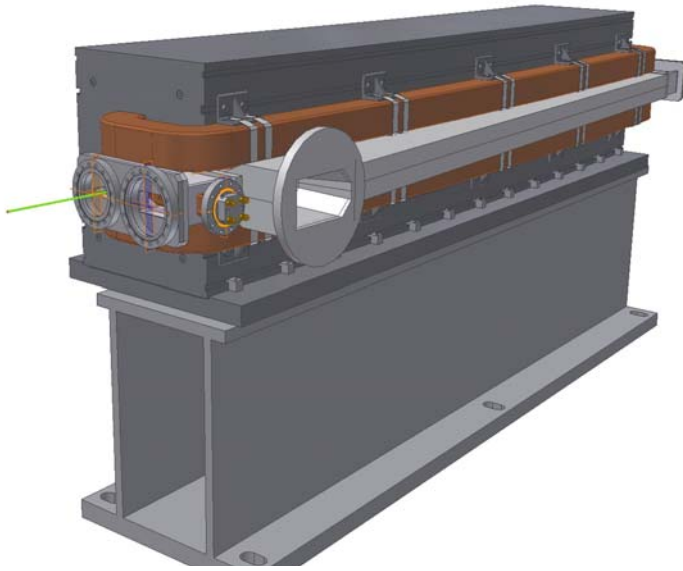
The 90 mm aperture dipole design concept with an IR beam extraction vacuum chamber installed.
